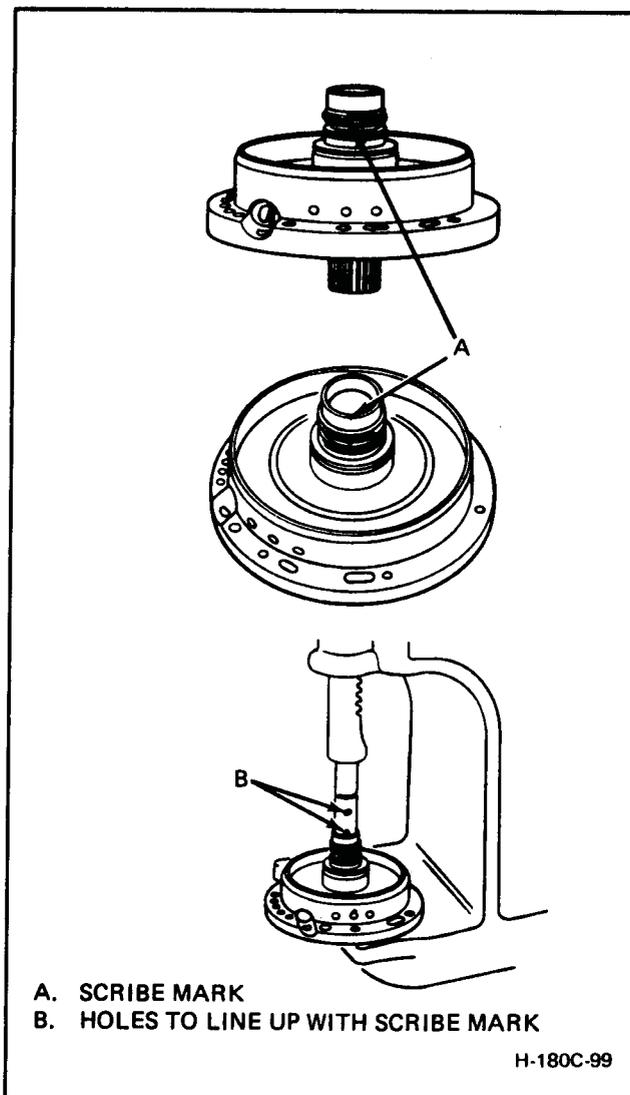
C-99 Installing Oil Pump Bushing - Rear (Inner)
